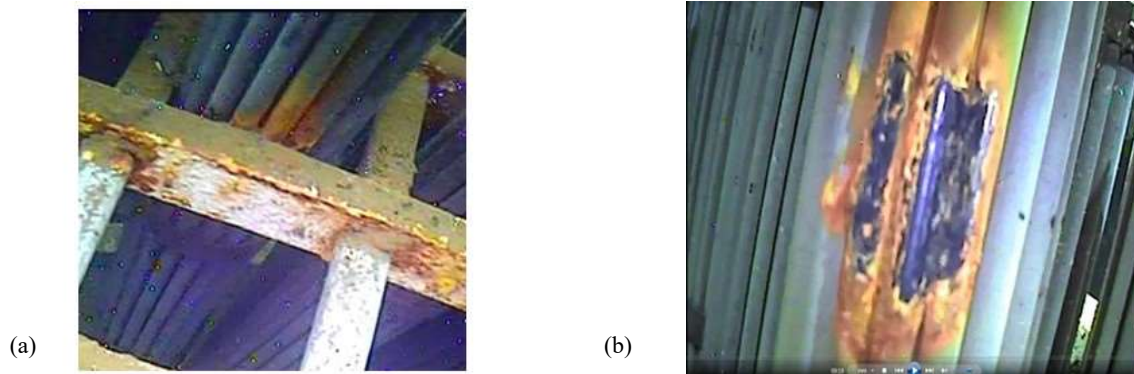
(a) Pressurized heavy water reactor (PHWR) fuel assembly in contact with mild steel grid in storage skip (in-pool). (b) Corroded area of PHWR fuel assembly where assembly was in contact with mild steel grid (courtesy of Nuclear Decommissioning Authority (NDA)).
